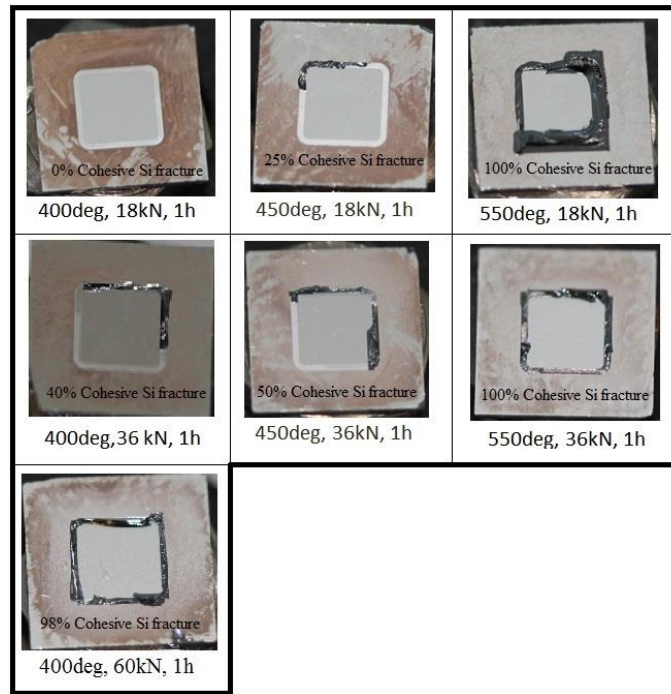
Typical fracture surfaces after pull testing of the F200R bond frame structure for all tested bonding temperatures and bond forces.
